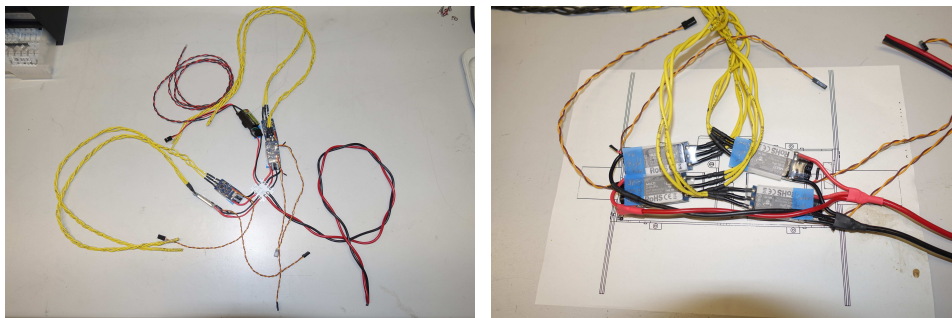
Left: Front ESC wiring. Right: Rear ESCs wiring.
